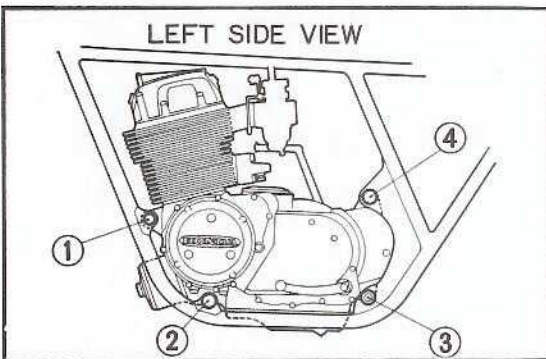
① 10 mm bolt                      ③ Rear engine hanger lower bolt                      ⑤ 8 mm×56 bolt
